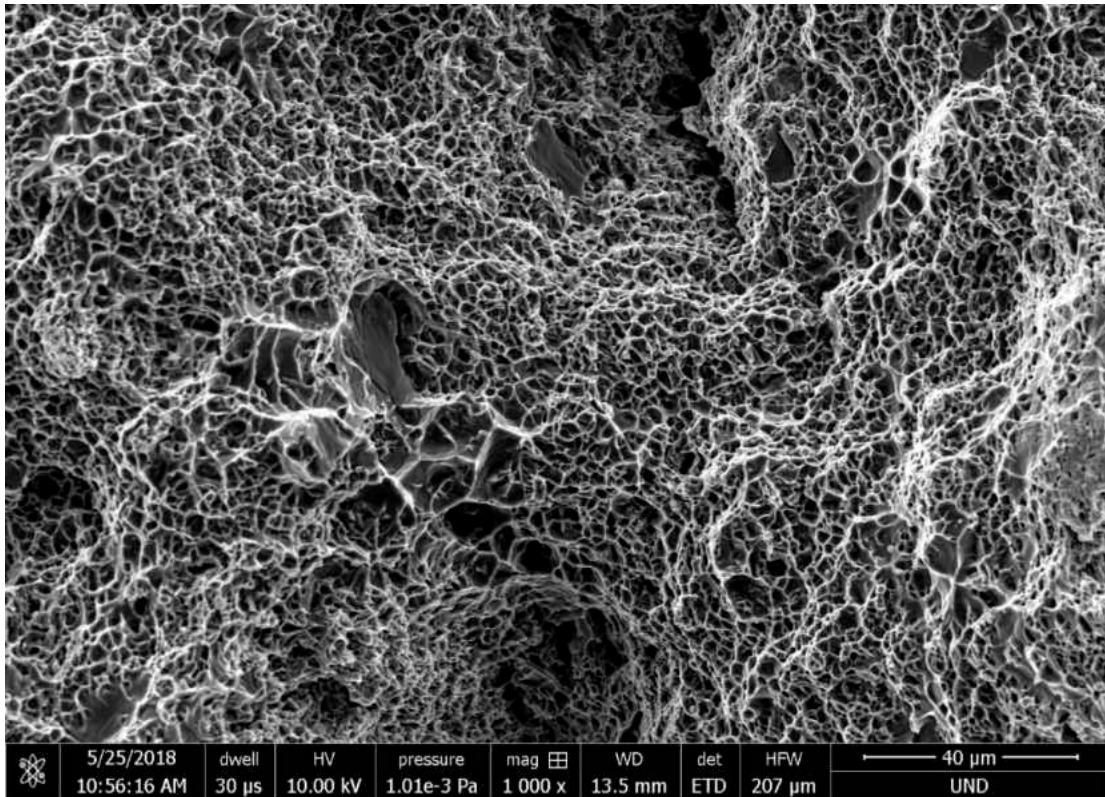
Ductile failure and the crack in this weld. (1530 RPM, and 420 mm/min)
